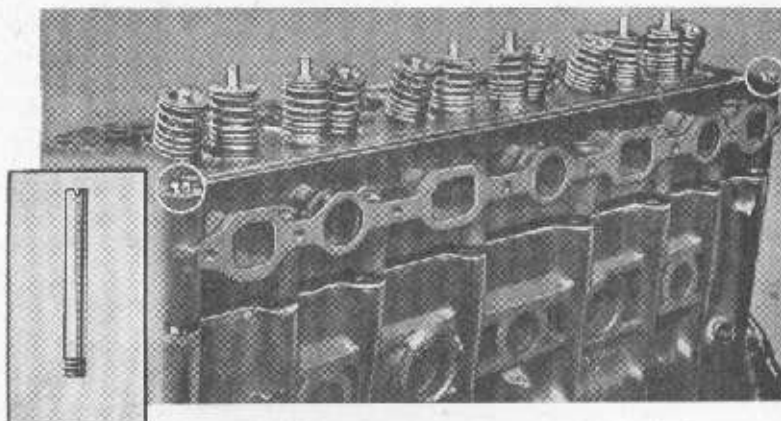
Cylinder head guide studs. These studs, which can be made from spare cylinder head bolts, should be used to prevent damage to the gasket whenever the cylinder head is refitted.
